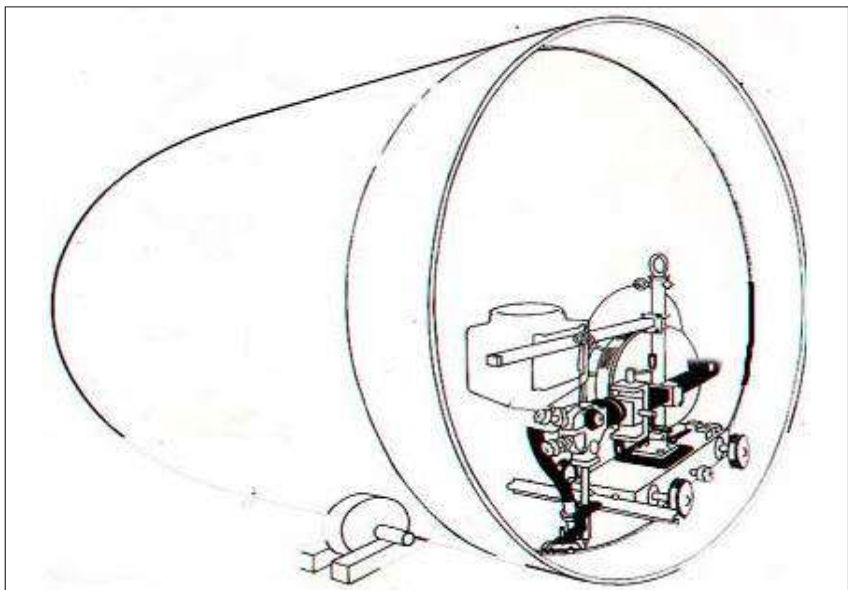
(d) Ring Seam Welding In The Cylinder
